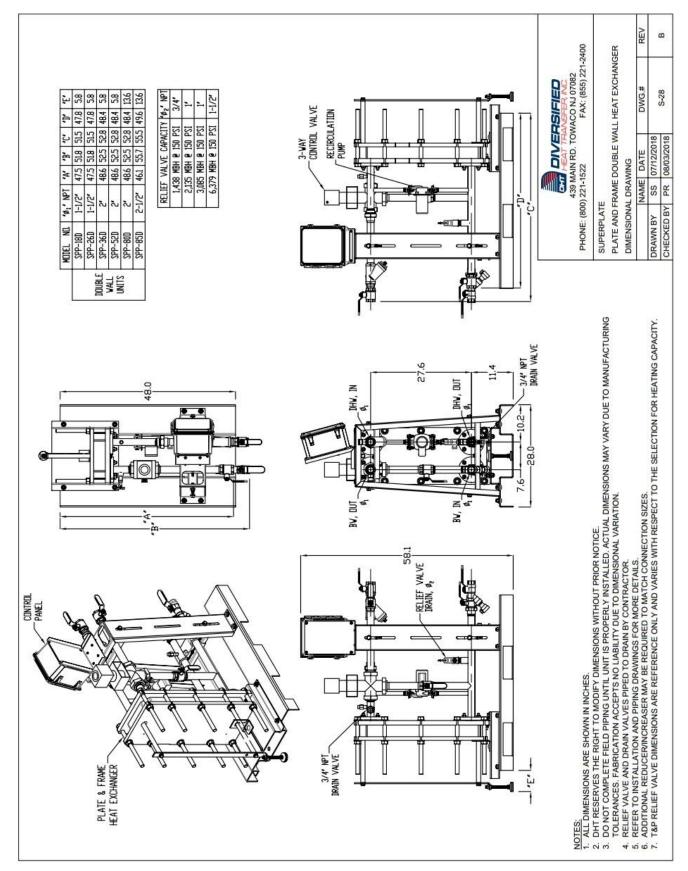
SuperPlate Plate & Frame Dimensional Drawing
